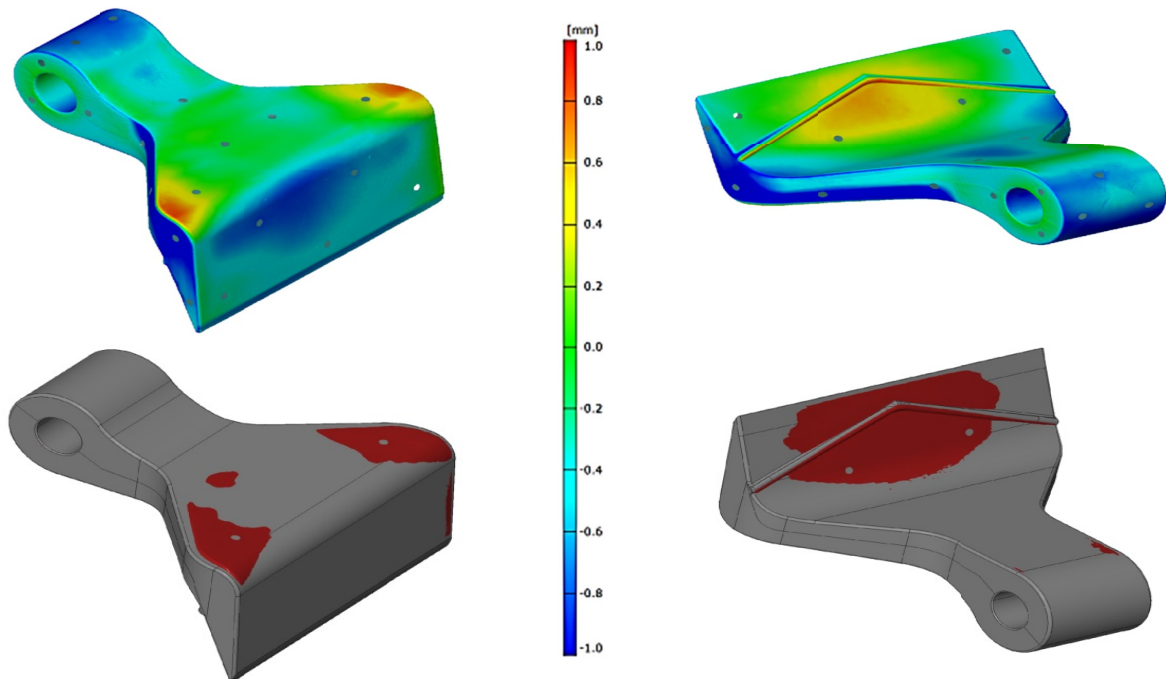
Measurements of dimensional deviations of the RM4 mulcher castings and matching the casting scan to the CAD model with the best fit method
